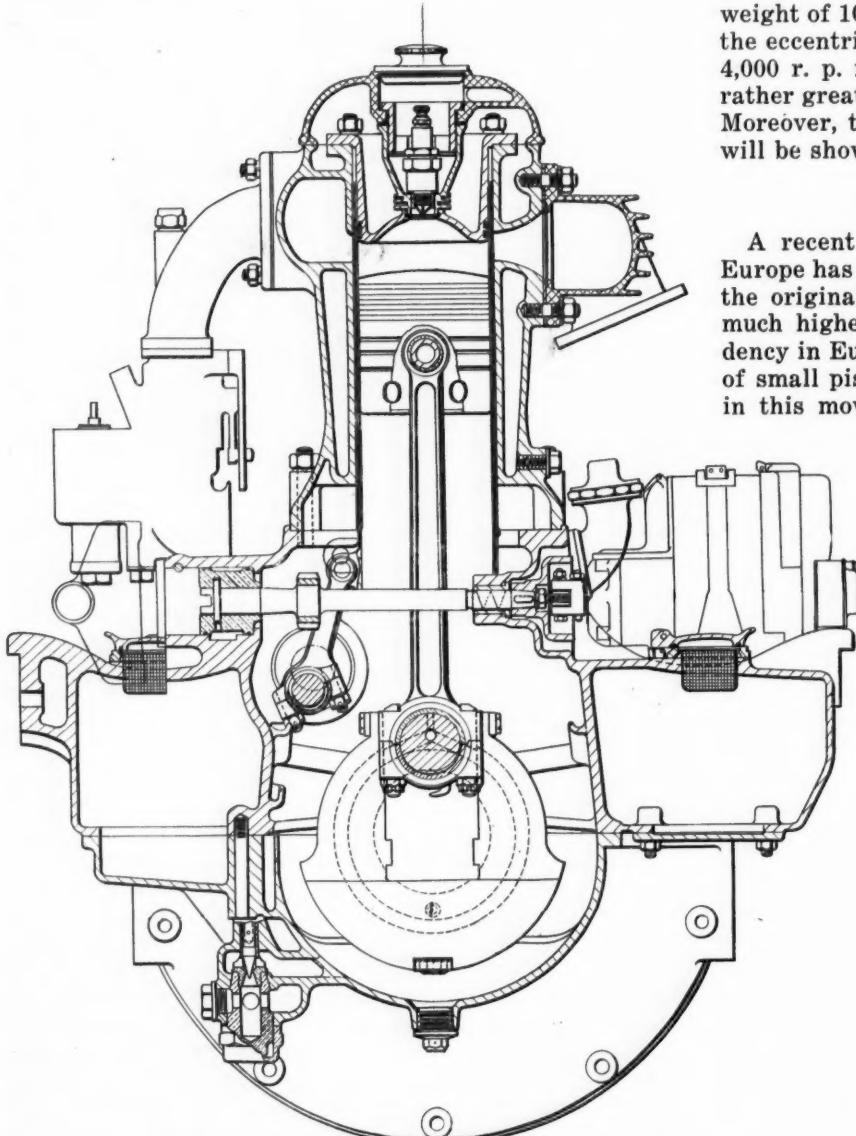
Cross section of Panhard Knight 10 hp. passenger car engine
